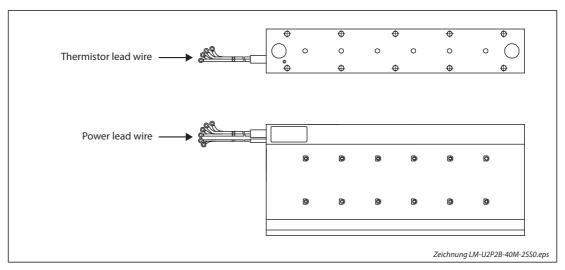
Servo motor series LM-U2 (Primary side – coil)
